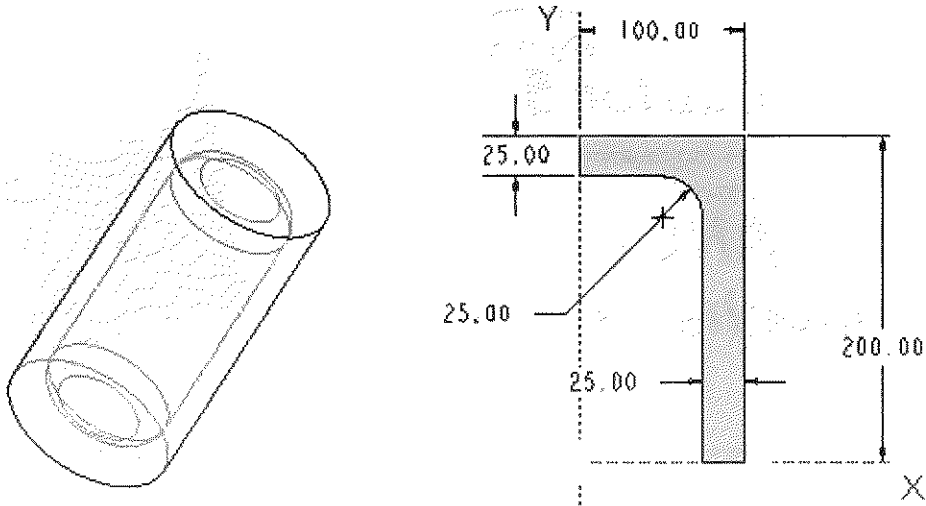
Cylindrical pressure vessel; dimensions in mm.
